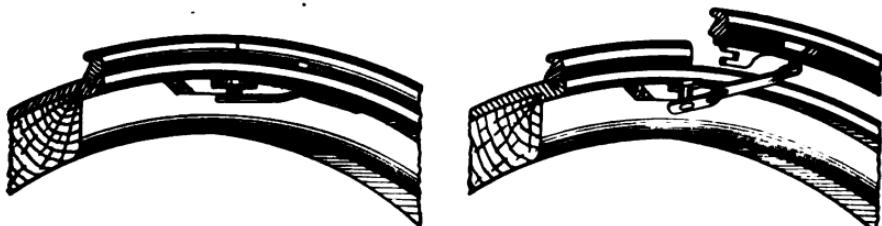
Latch Used for Locking Single Combination Ring which Replaces Former Side Ring and Locking Ring
